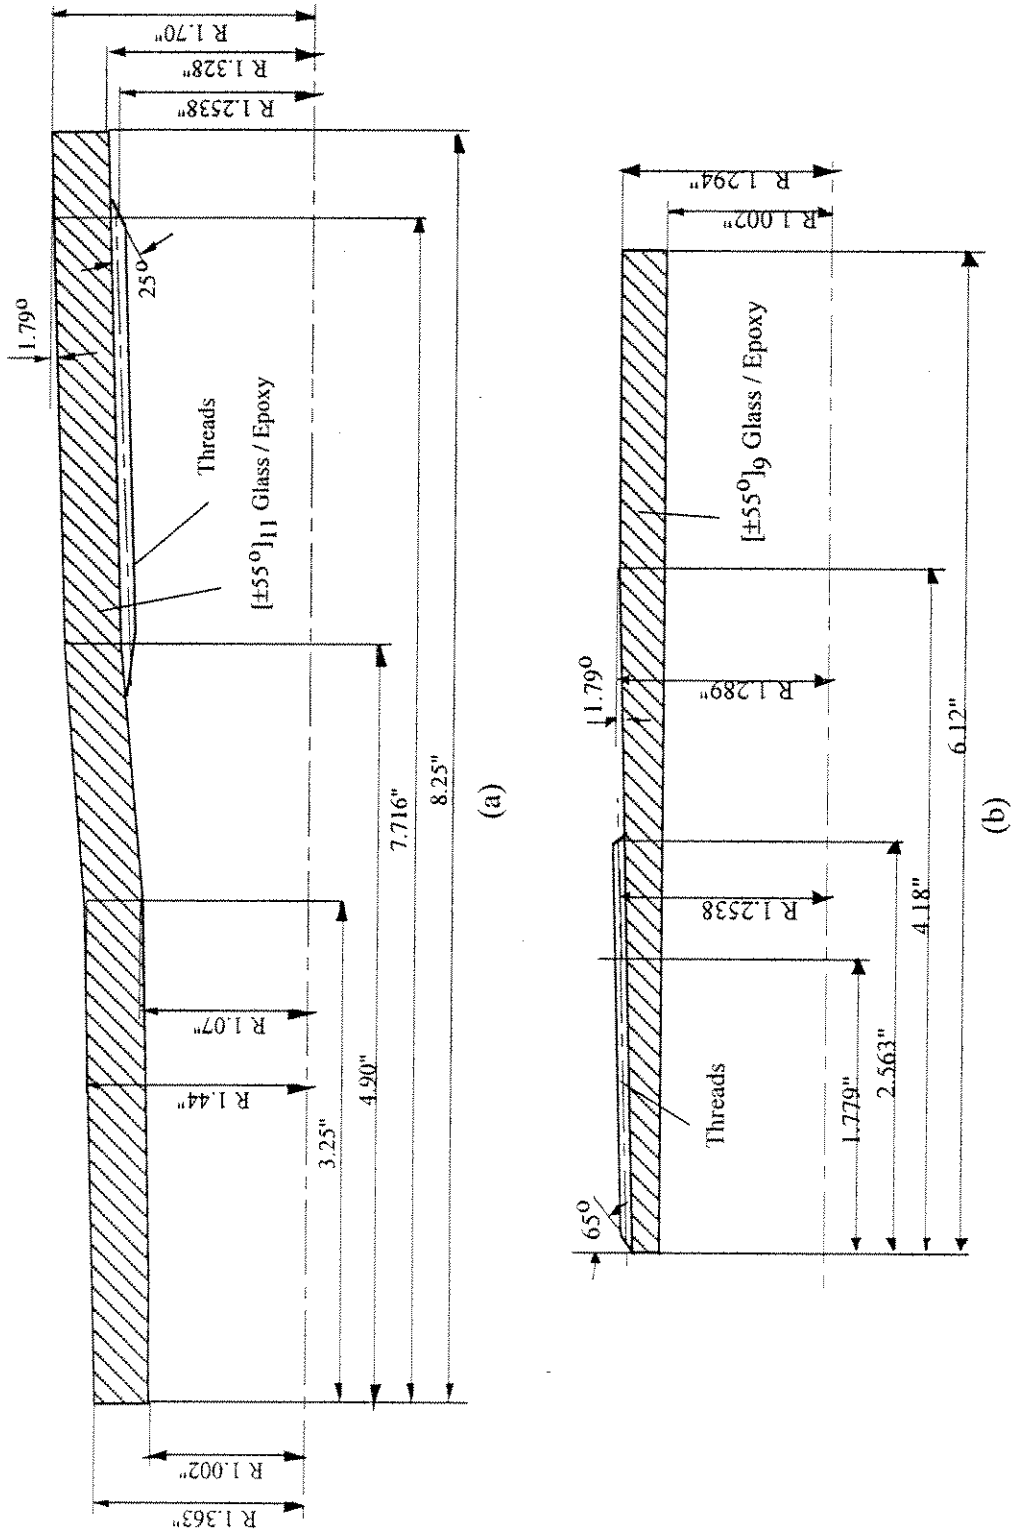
Threaded Integral Composite Joint, (a) Mill End and (b) Field End
